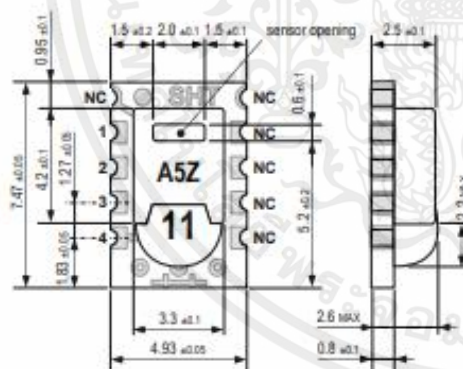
Drawing of SHT1x sensor packaging, dimensions in mm (1mm = 0.039inch). Sensor label gives "11" for SHT11 as an example. Contacts are assigned as follows: 1:GND, 2:DATA, 3:SCK, 4:VDD.
